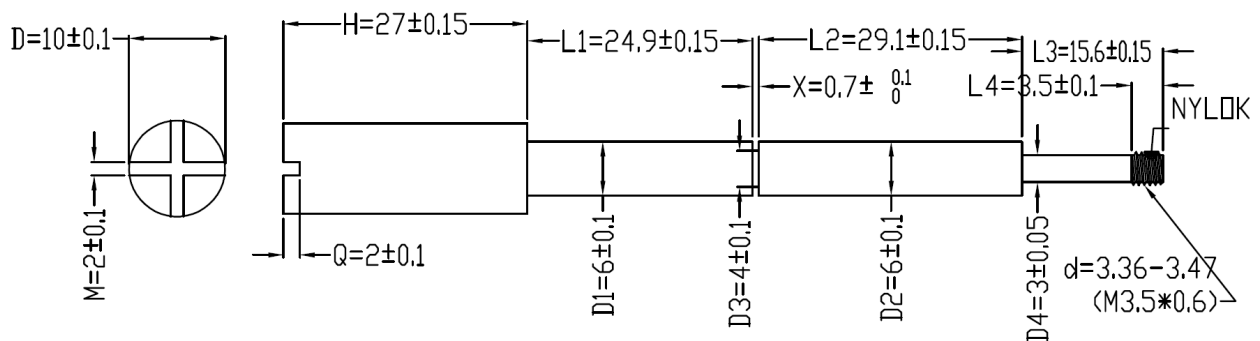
Drawing of Wujiang Screw MDCM0359733N
